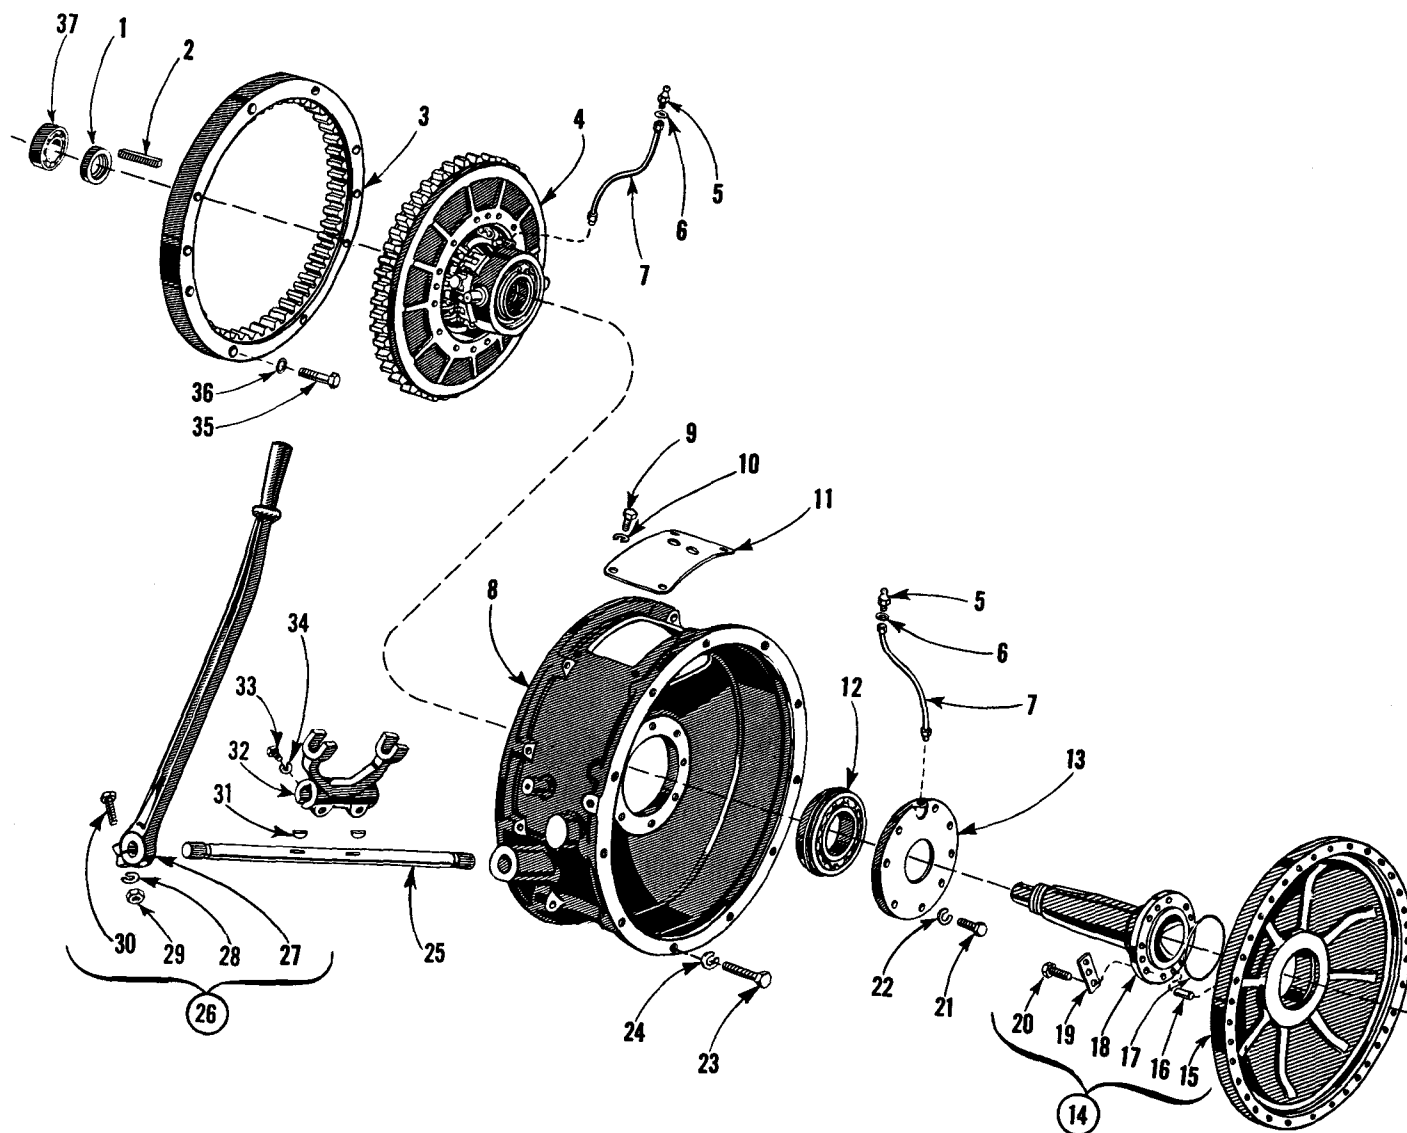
Manual, overcenter, input-disconnect clutch — exploded view
